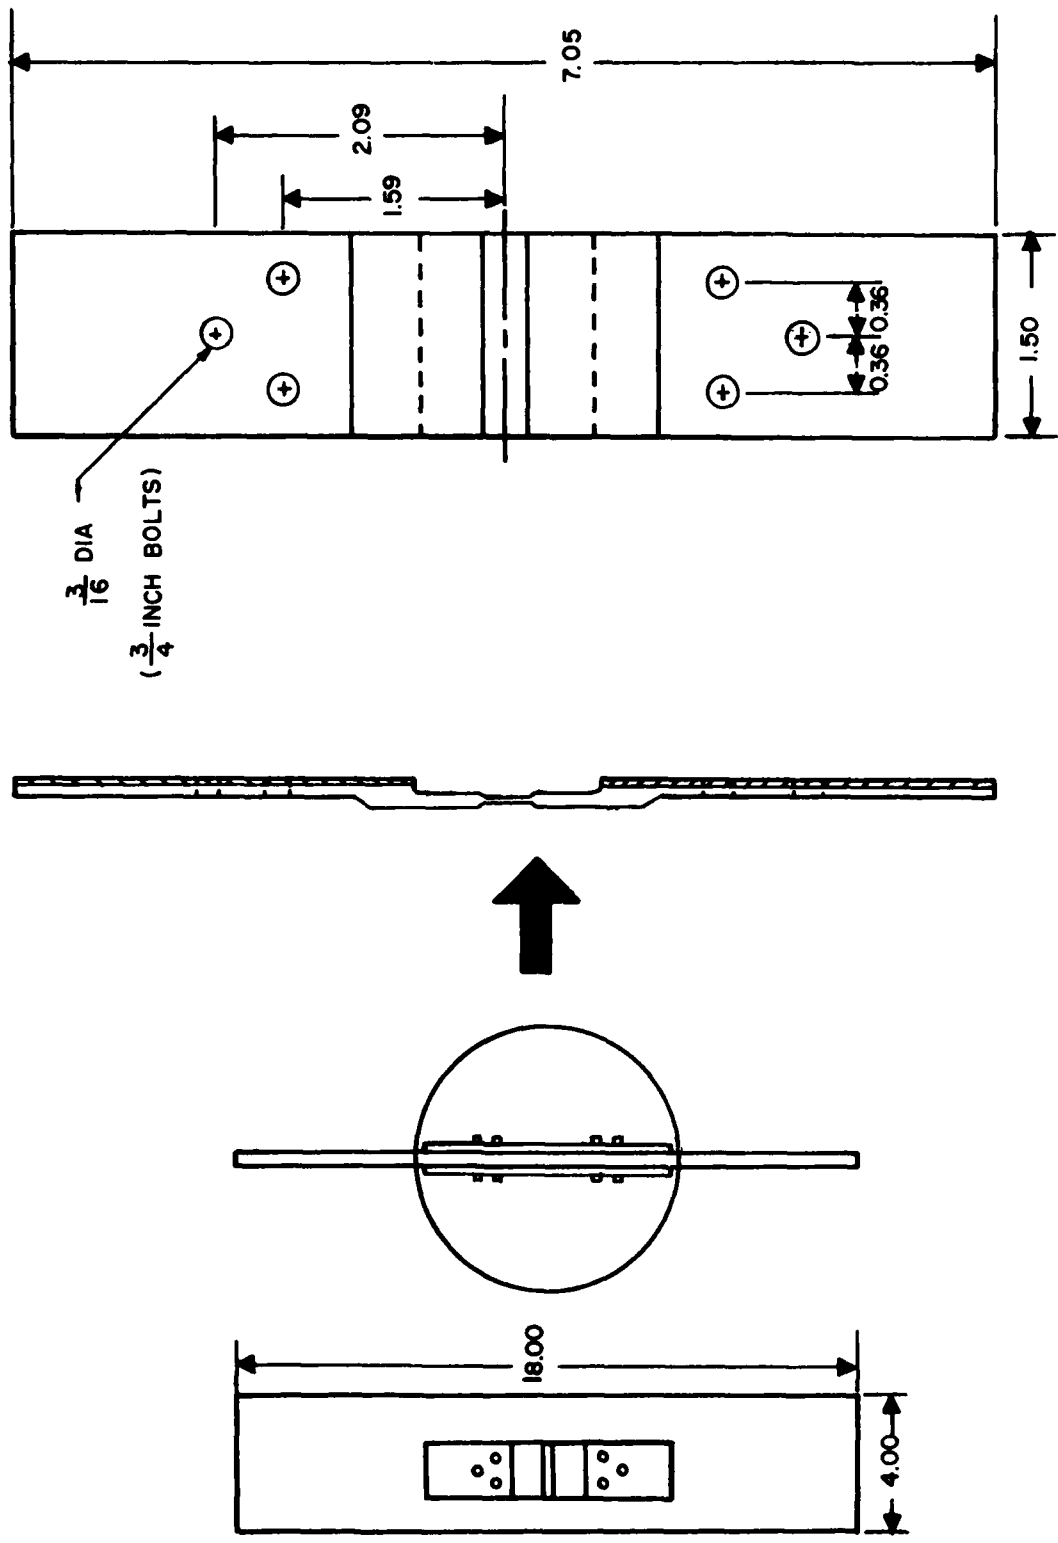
Crack Growth Gage Test Configuration: Full Length Gage (With Pre-cracking Tabs) - Bonded and Bolted
